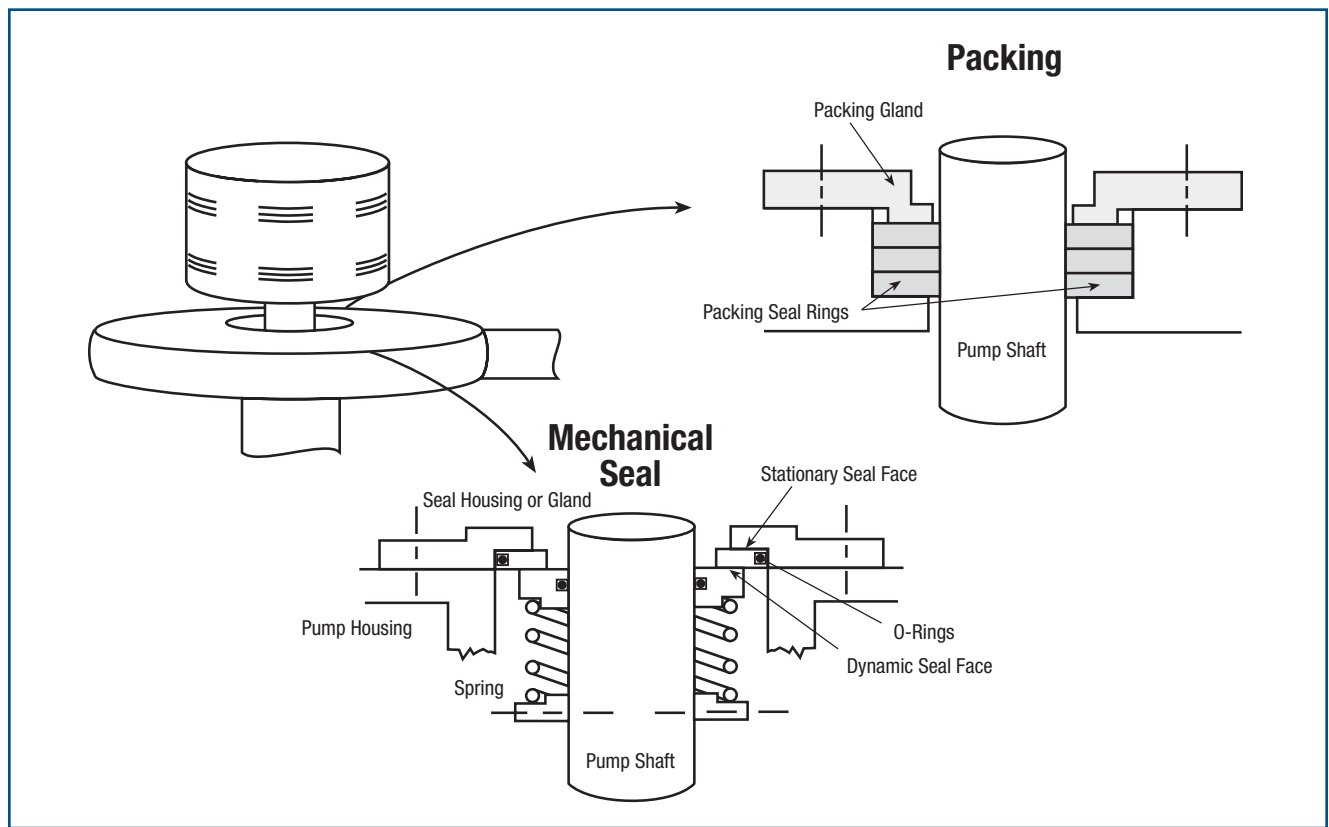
Two Types of Sealing Methods: Packing and Mechanical Seals
